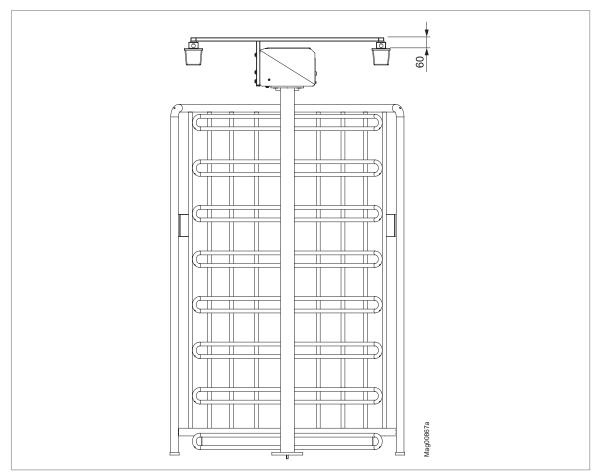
Dimensions MPT-333 – side view (dimensions in mm), illumination optional
